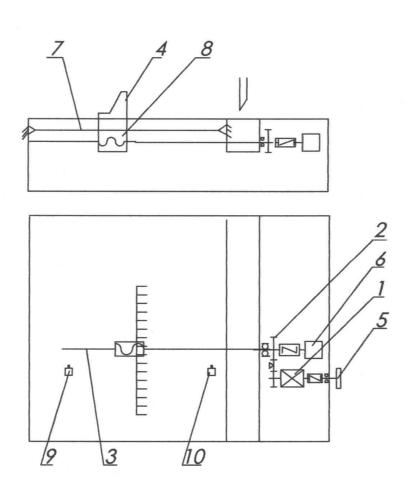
Kinematic diagram for the clamping bar drive mechanism
